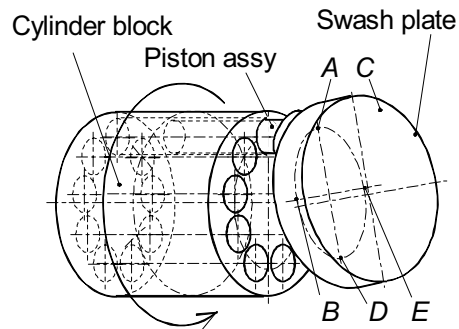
Location of thermo-couples installed in the swash plate (rotating cylinder-block type piston pump)
